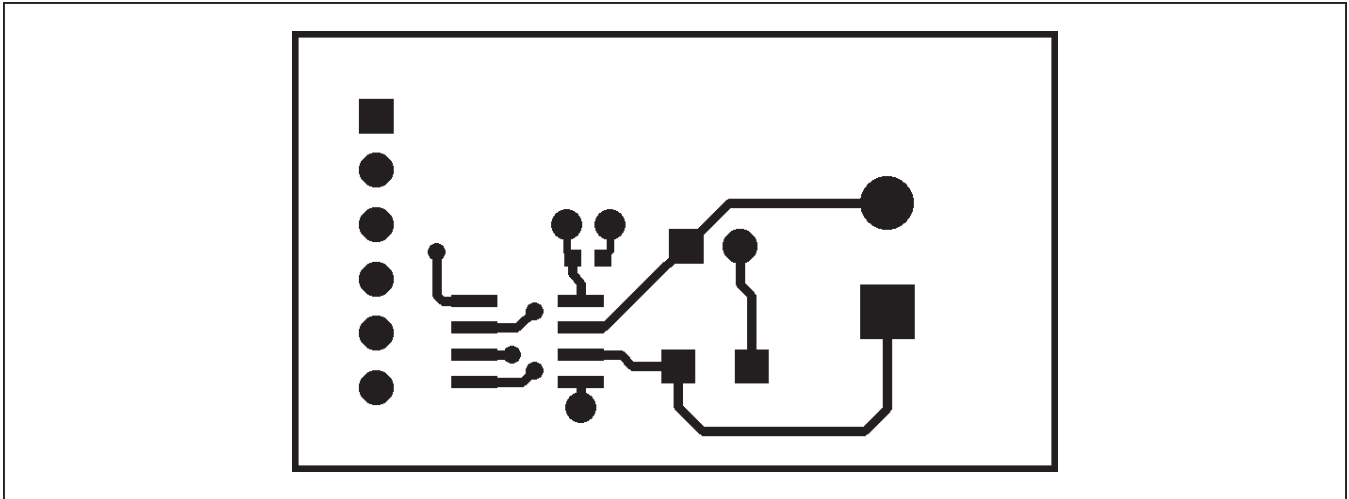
MAX14840PMB1 Peripheral Module PCB Layout—Component Side
